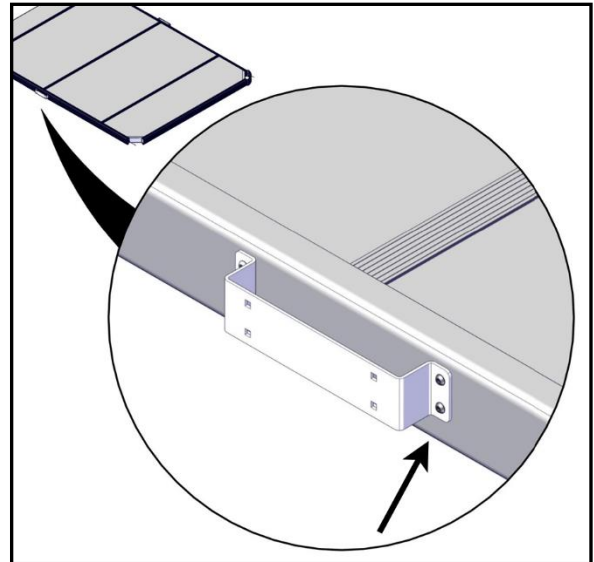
SUPPORT BRACKET SCREW TIGHTENING
